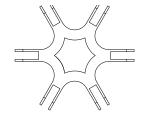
FRONT ELEVATION J6: 6-Point Display Joint Connection Not to Scale
